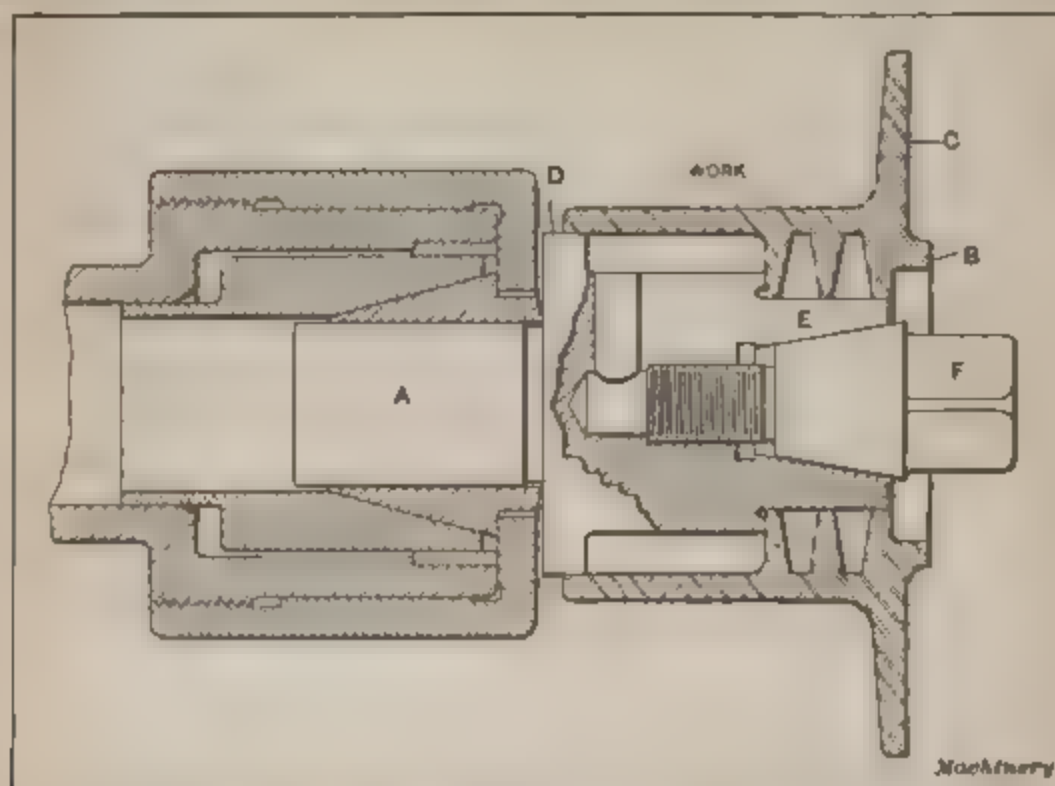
Arbor held in Collet and expanded by Internal Taper Plug
